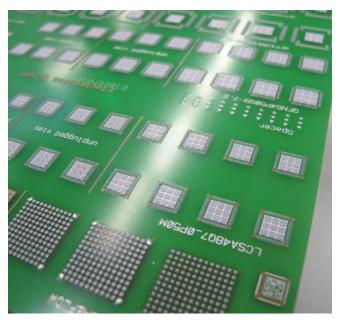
Solder paste print configuration. (Examples of window pane solder prints on QFN components used in benchmark samples.)
